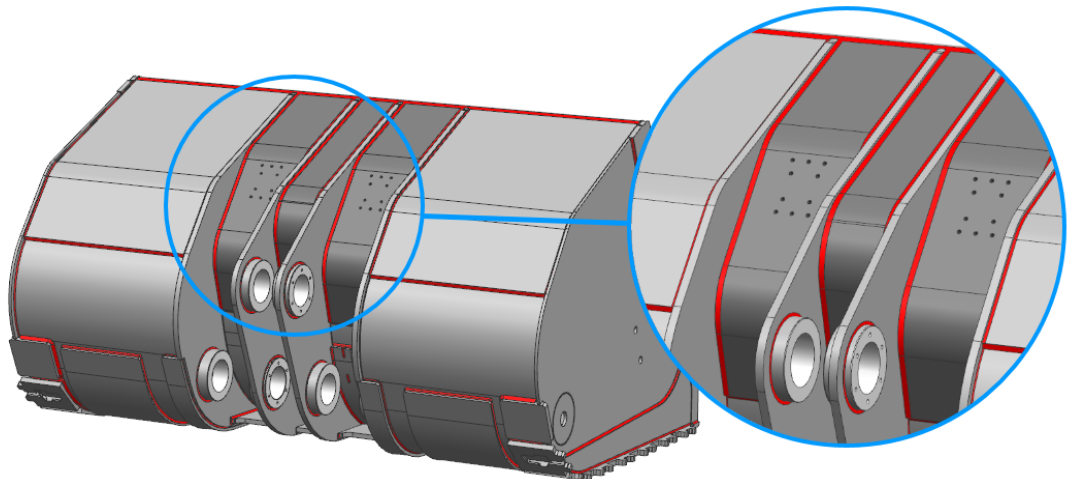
Bucket frame. Air gap on the double beveled weld between floor plates is not a requirement.
